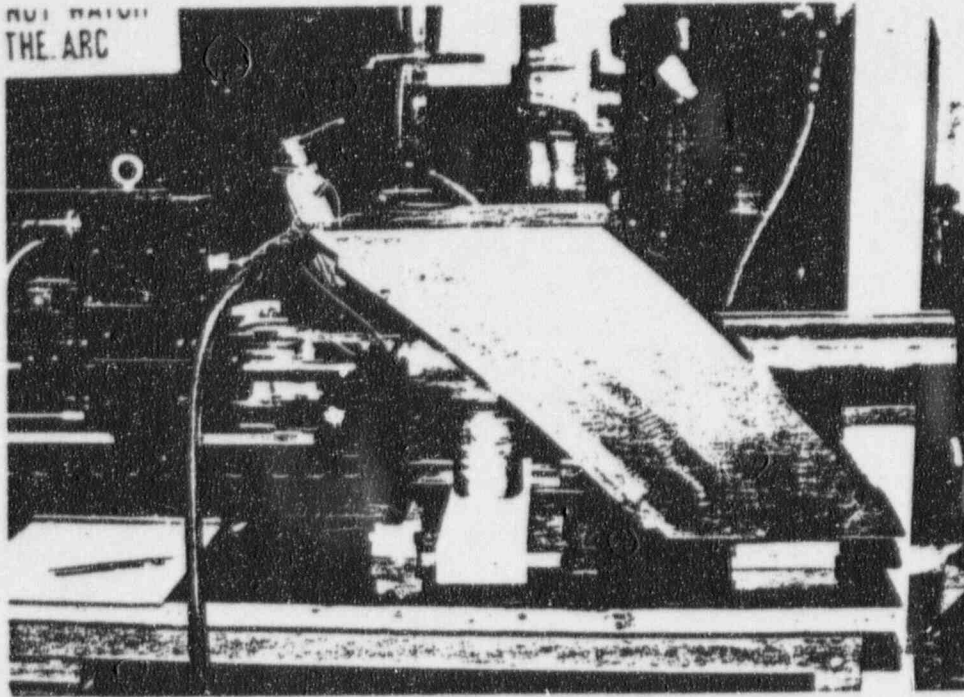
Photograph Depicting Weld Tooling Set-Up In Full Size Penetration Tube Mock-Up
